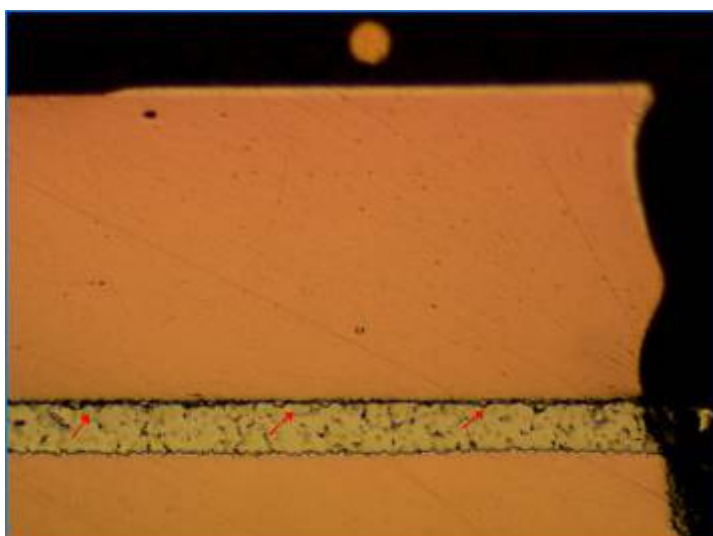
cross section, SN79, U28, left lead solder crack, 200xb
